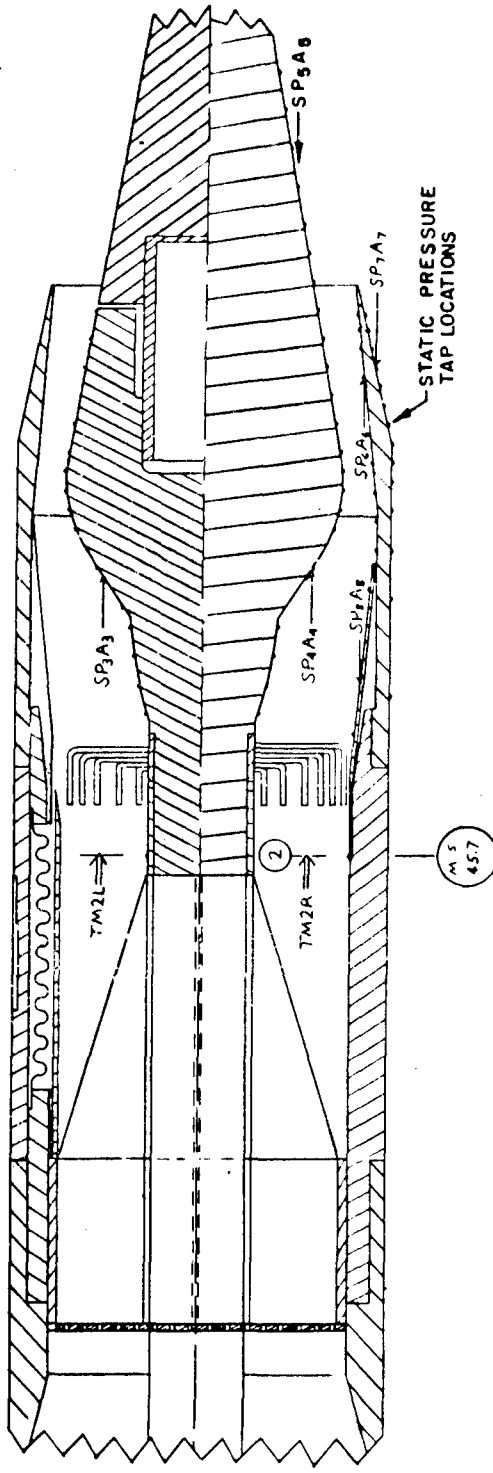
BALANCE AND AFTBODY SECTION ASSEMBLY
